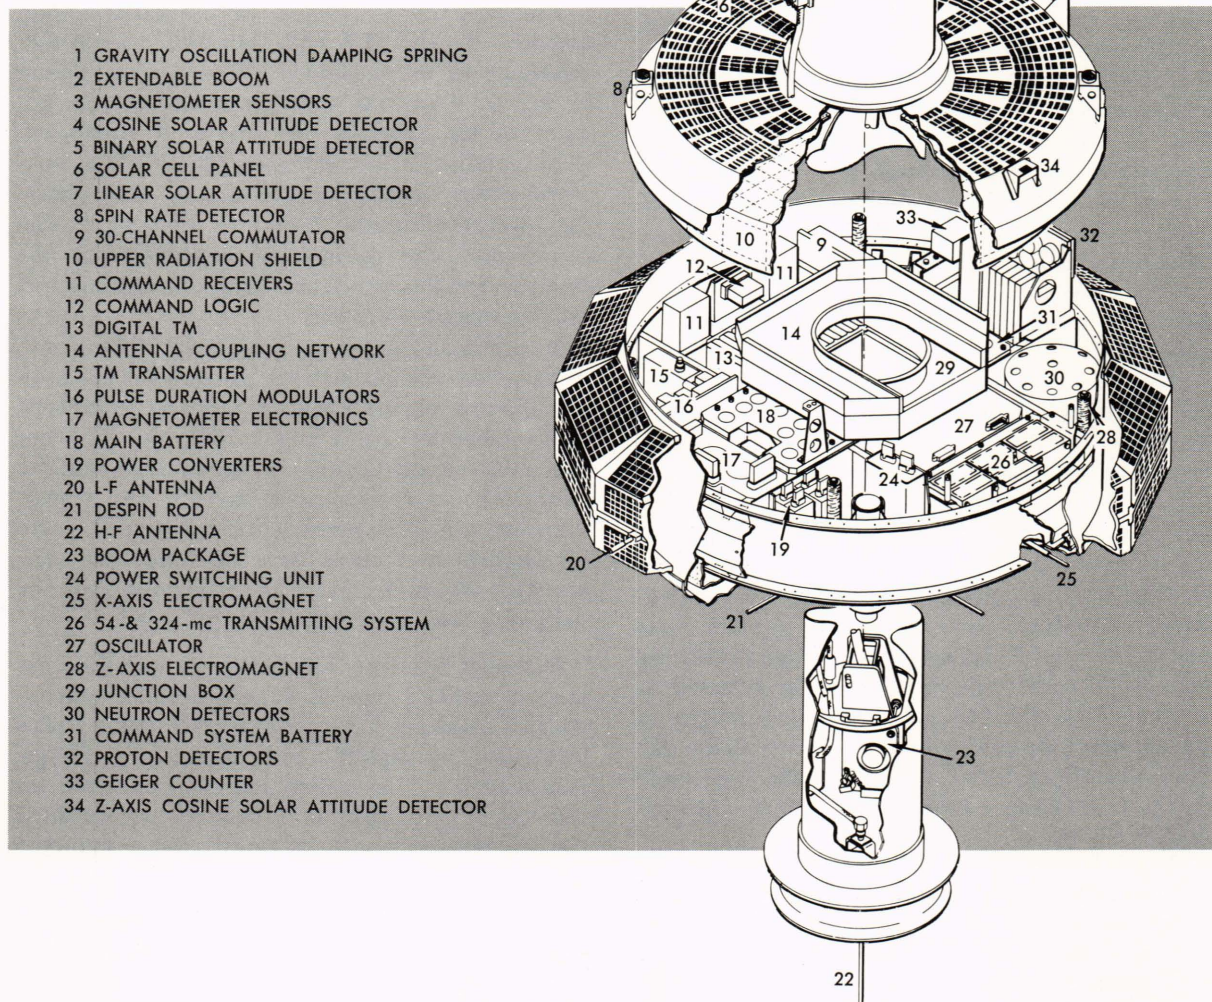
TRAAC satellite exploded cutaway view showing location of major components. Attaching flange for mating the TRAAC and Transit 4B satellites during launch is at the bottom.
